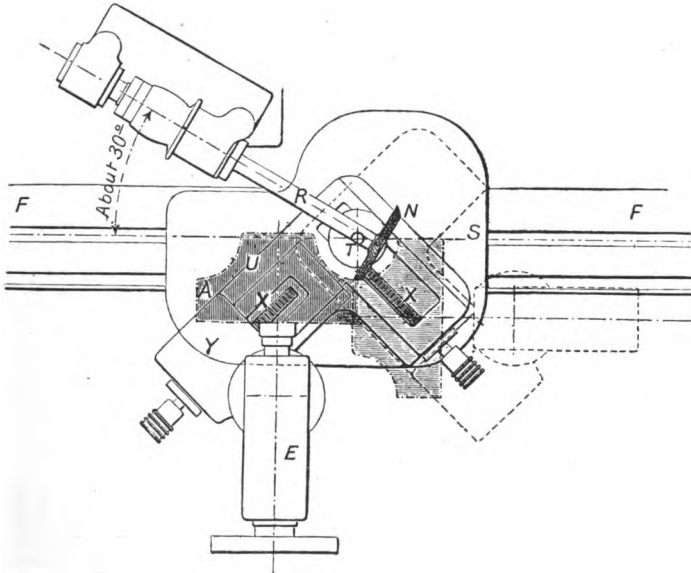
Special Grinding Fixture. Wm. Muir & Co. Ltd.
